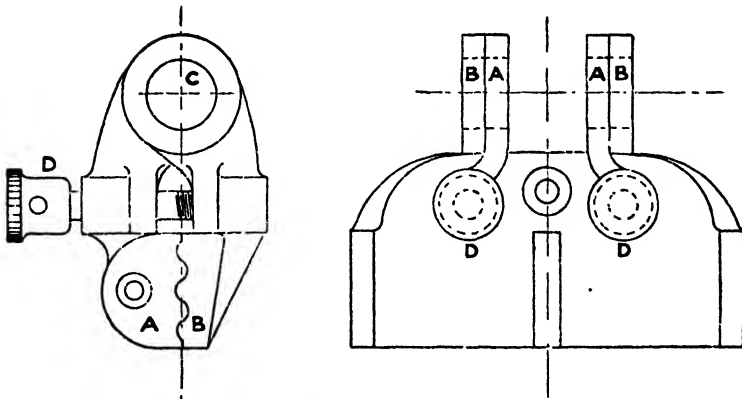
AVERY'S FABRIC TESTING MACHINE SHACKLES
